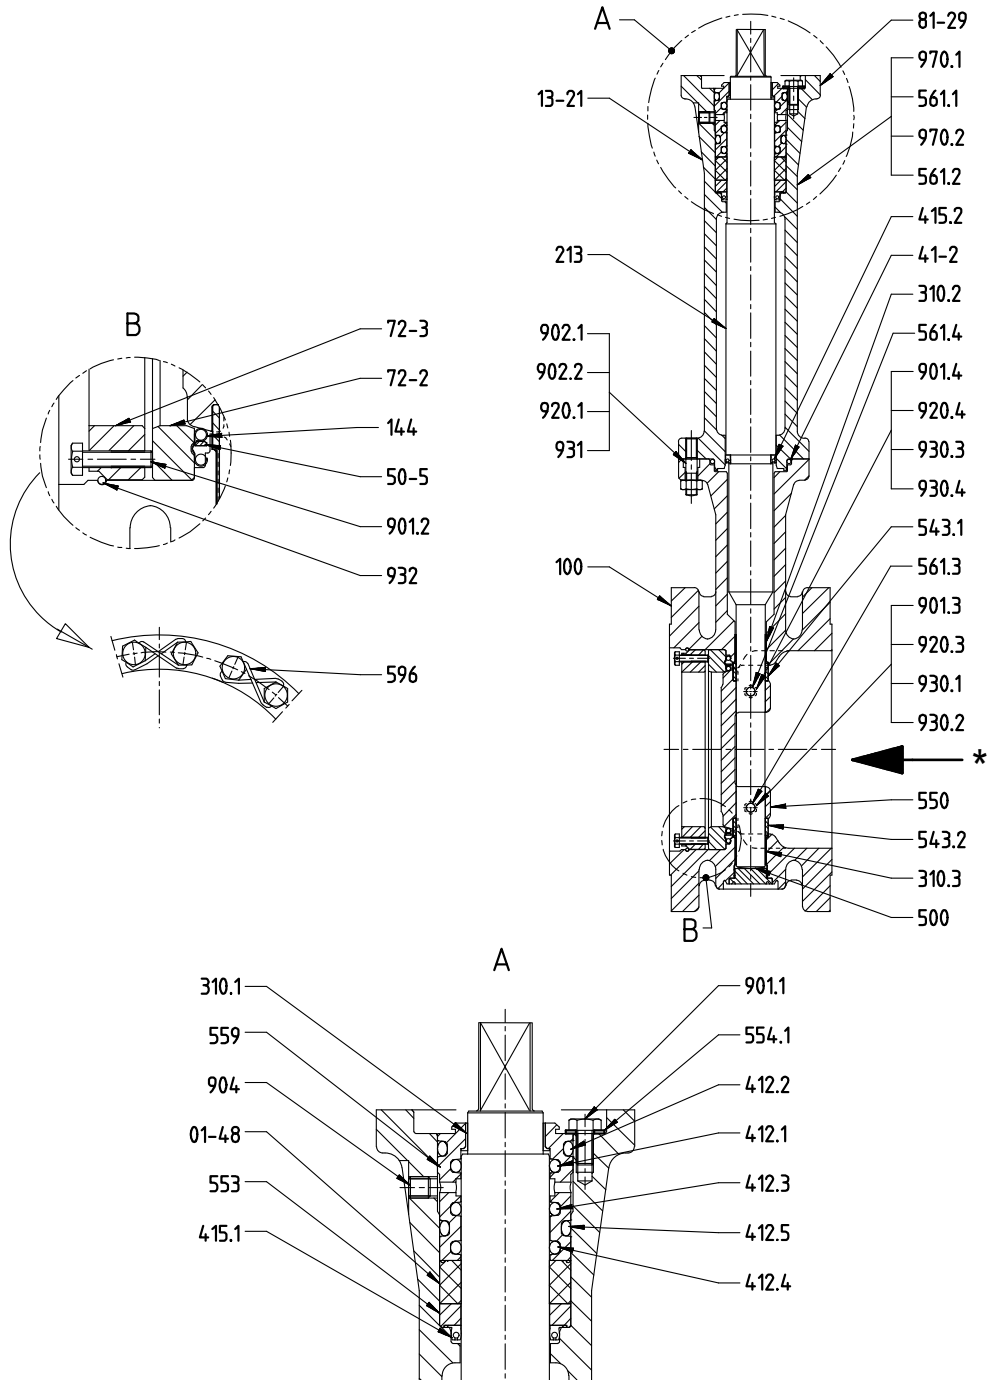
Sectional drawing of DANAIS CRYO T7 - DN 80-150 (3-6 in.)
